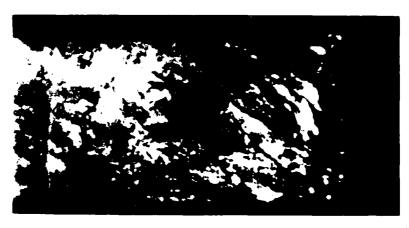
Massive and closely spaced needles on fracture surface of tension specimen with longitudinal weld (32X)
